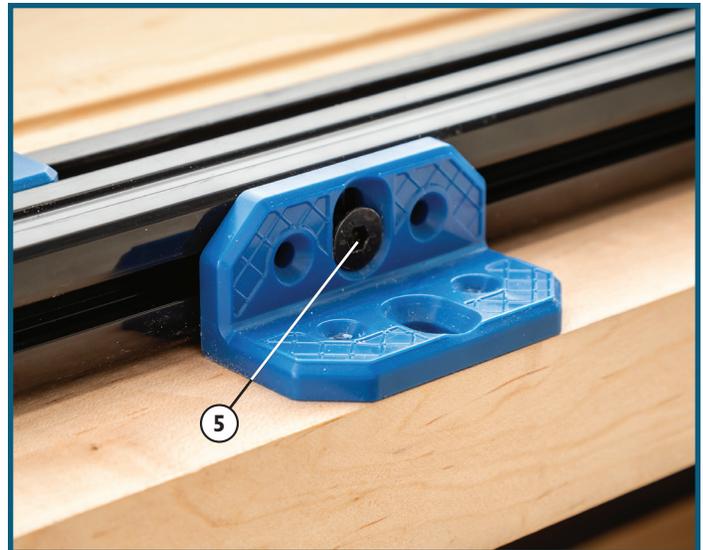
Orientation for 3/4" to 1" thick workpieces
